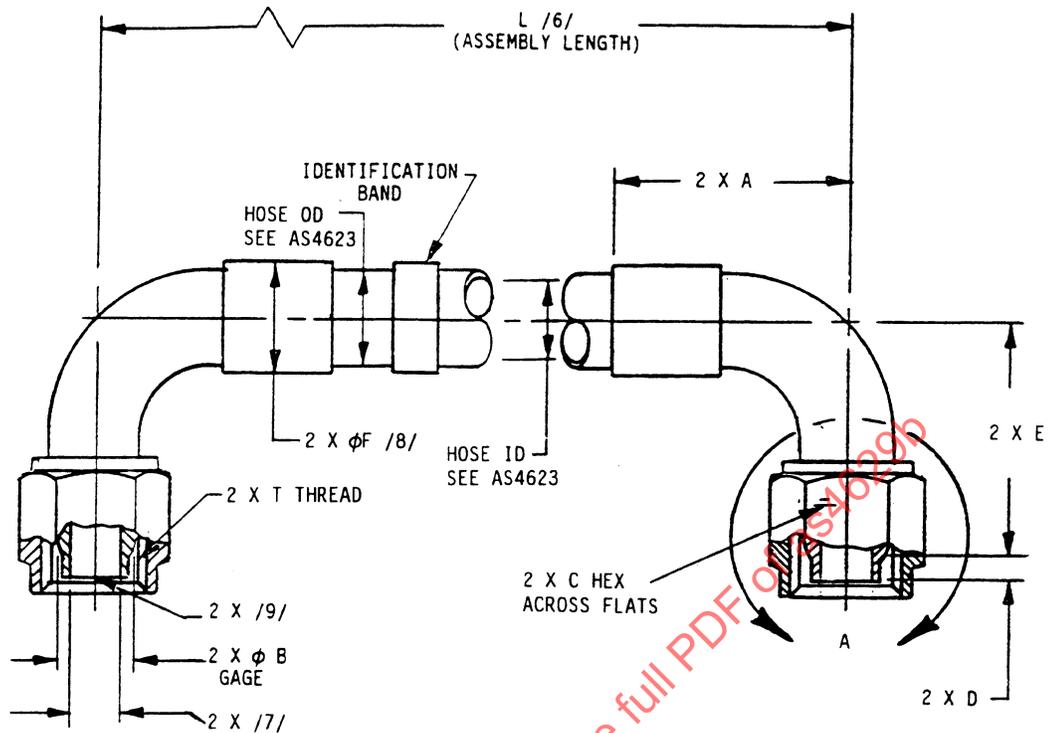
HOSE ASSEMBLY, 90° ELBOW TO 90° ELBOW
